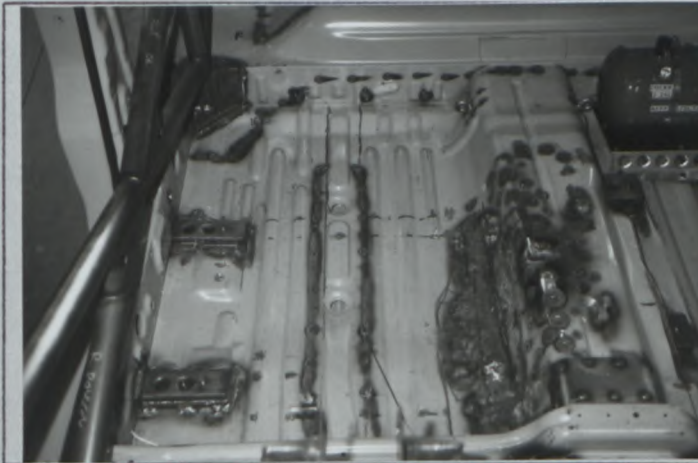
SEAT MOUNTING BRACKET ( Co Dr. Seat )
